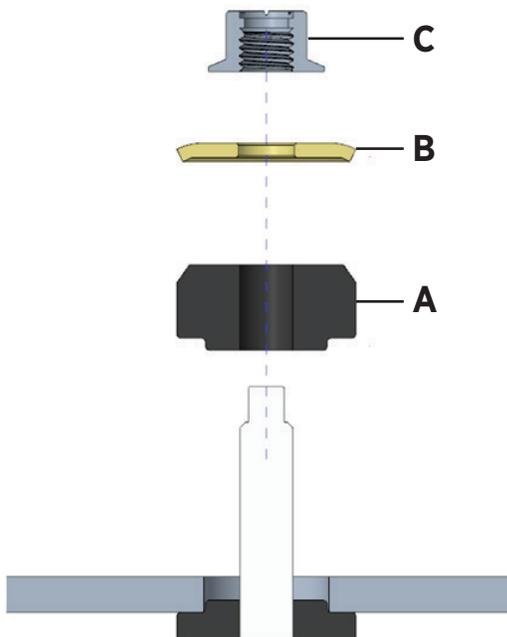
Install the hardware into the FOX shock: bushing (A), washer (B), flange nut (C).
